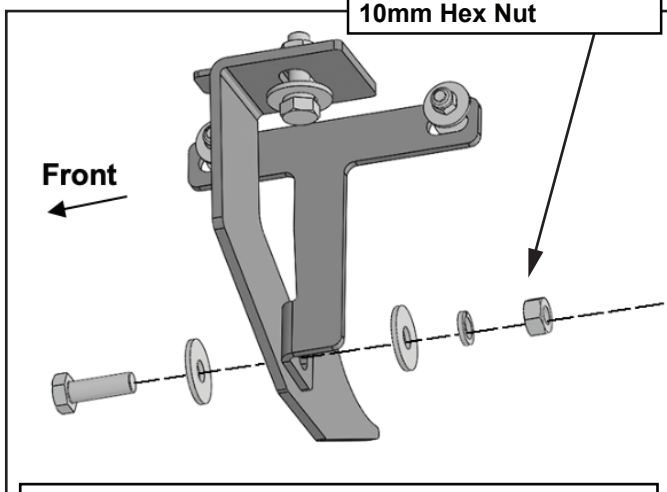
Attach (1) Passenger/Right Support Bracket to the pinch weld
